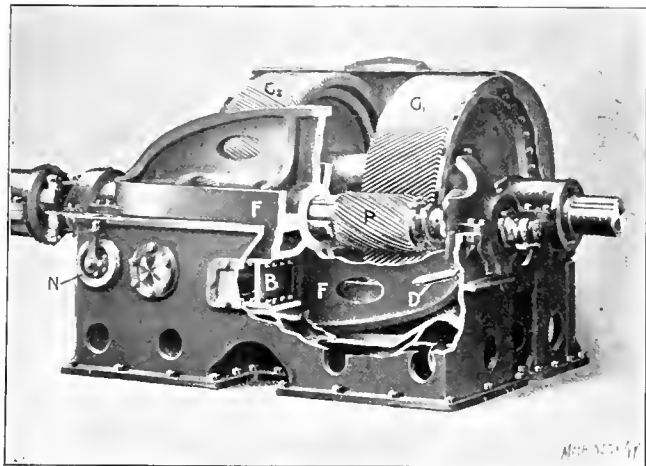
Sectional View of the Reducing Gearing, showing the Floating Frame
